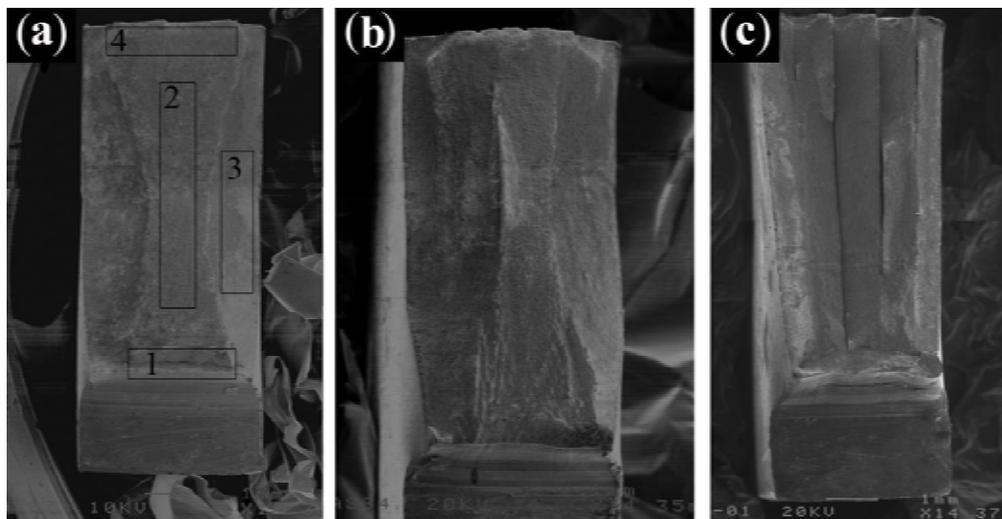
Fracture surfaces of specimens cut of the layered material of type I (a, b) and II (c).
